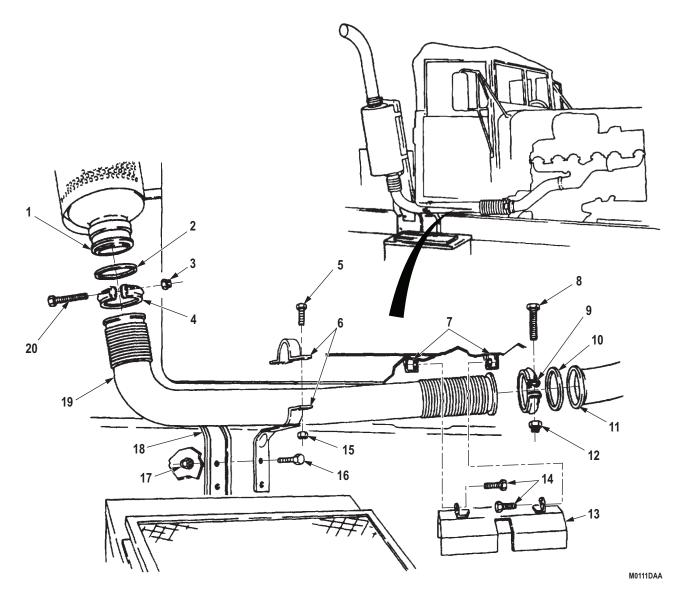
Rear Exhaust Pipe, Support Bracket, and Cab Heat Shield Removal.
